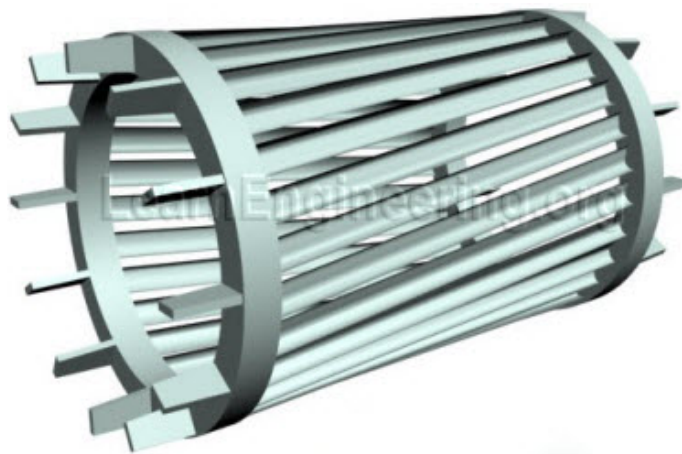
Squirrel cage rotor which is the most commonly used one in induction motors.
